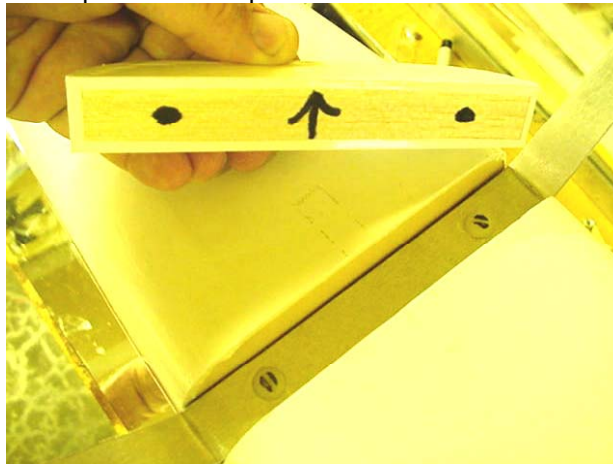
Inside view of mounting points with 1/4-20 nylon hardware installed
